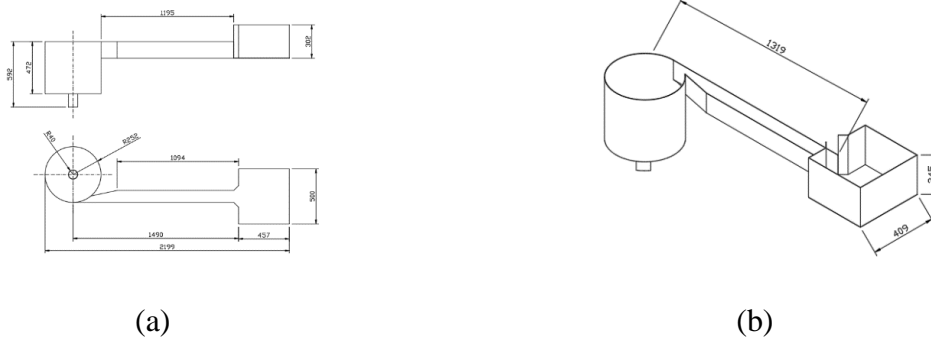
Basin and canal: (a) orthographic view, (b) isometric view. All dimensions are in millimeters.
